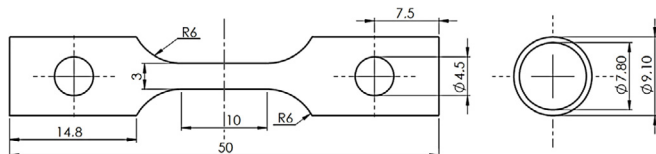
Drawing of the machined two-winged axial tensile test samples. Dimensions are given in millimeters.
